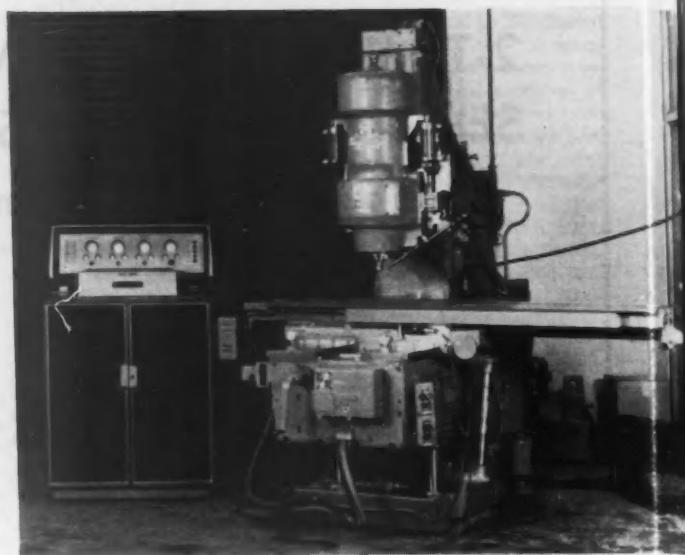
A Ferranti console (approximately 60.5 in. high x 39.5 in. wide x 40.5 in. deep) controls this Kearney and Trecker vertical milling machine
